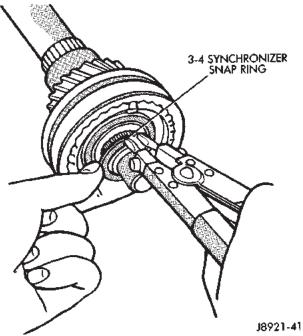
Remove 3-4 Synchronizer Snap Ring
